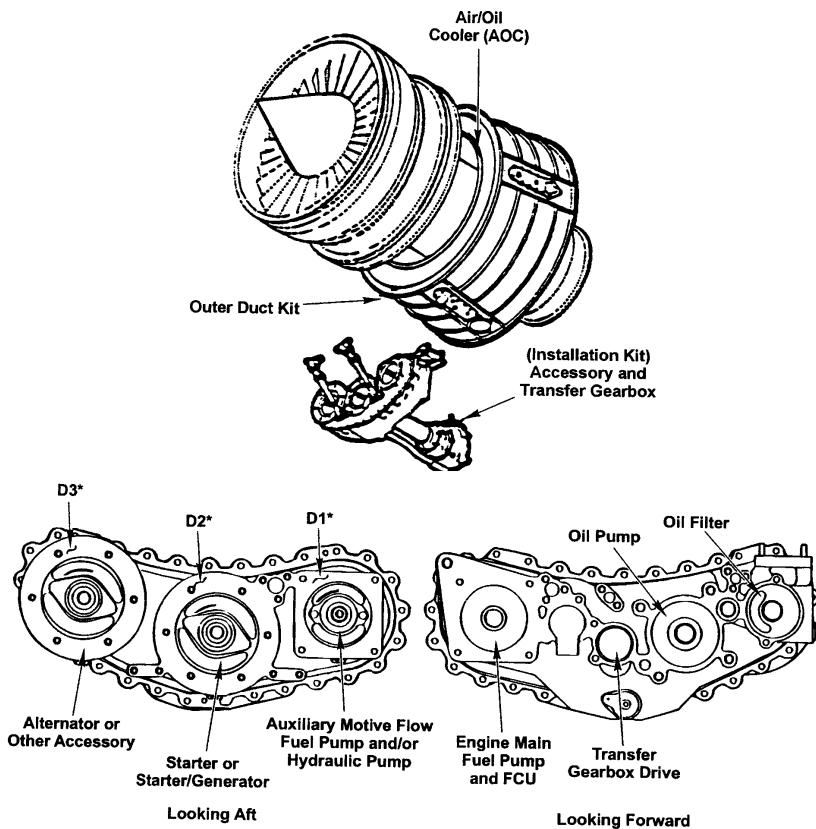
TFE731-40 Engine Accessory Gearbox
